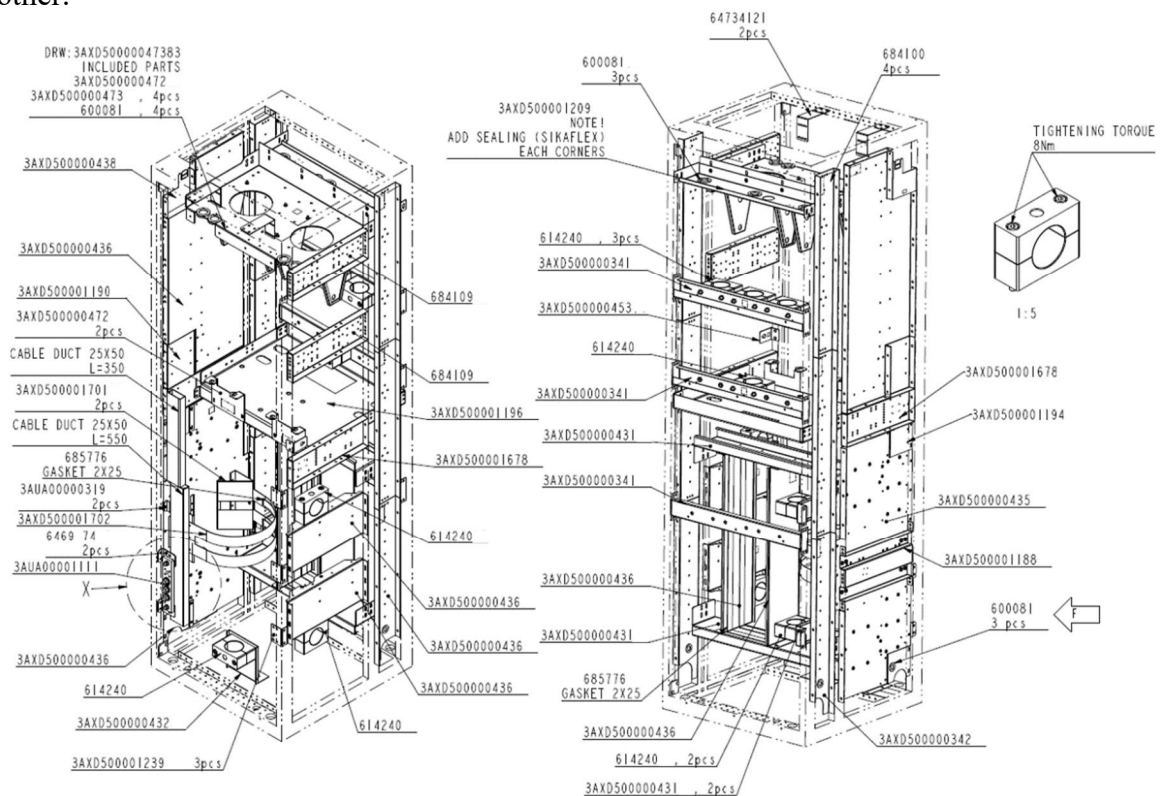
An example of a sheet of an assembly drawing. Parts are denoted with a material number and quantity.
